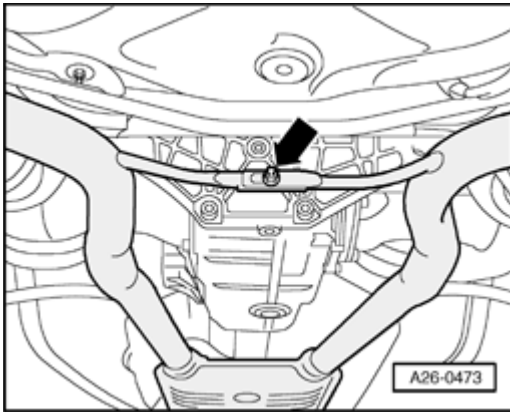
Loosening Threaded Connections Of Brace Between Exhaust Pipes
